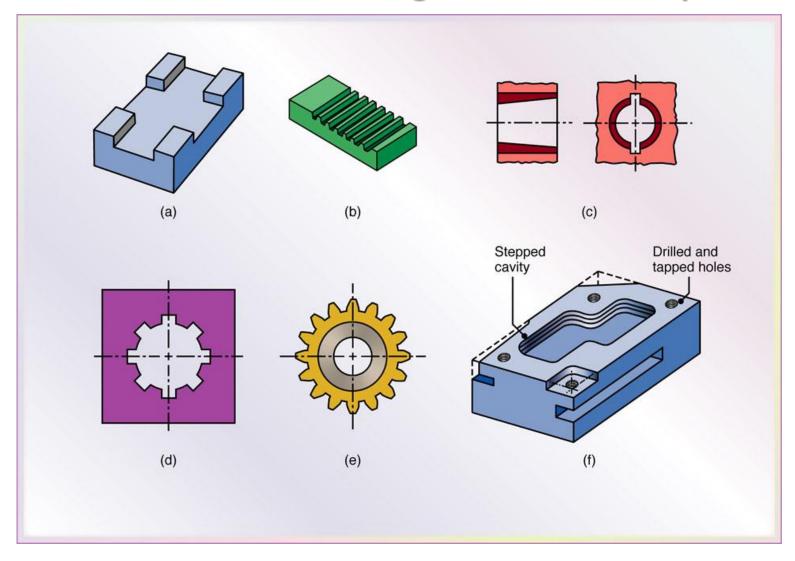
Typical parts and shapes that can be produced with the machining processes described in this chapter.
